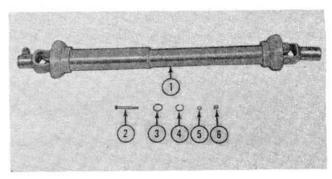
Shear Bolt Drive Shaft Assembly — Component 22-128
